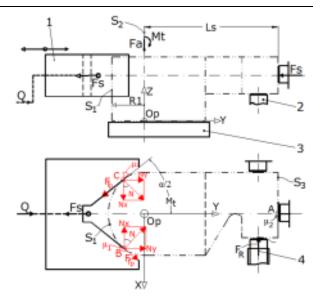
Scheme for applying the machining-fixing driving forces: $1 - \text{bearing prism}; 2 - S_2 \text{ axis}; 3 - \text{additional support}; 4 - \text{backing plate}; 5 - \text{adjustment pin.}$
